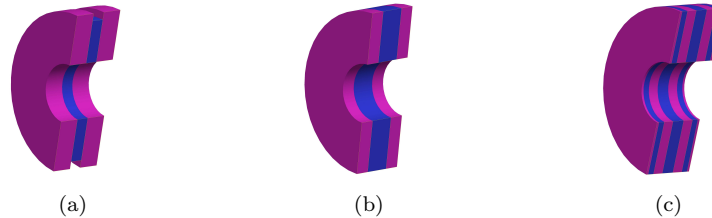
(a) Initial *MagneBike* wheel, (b) optimized wheel and (c) multi-layer wheel.
